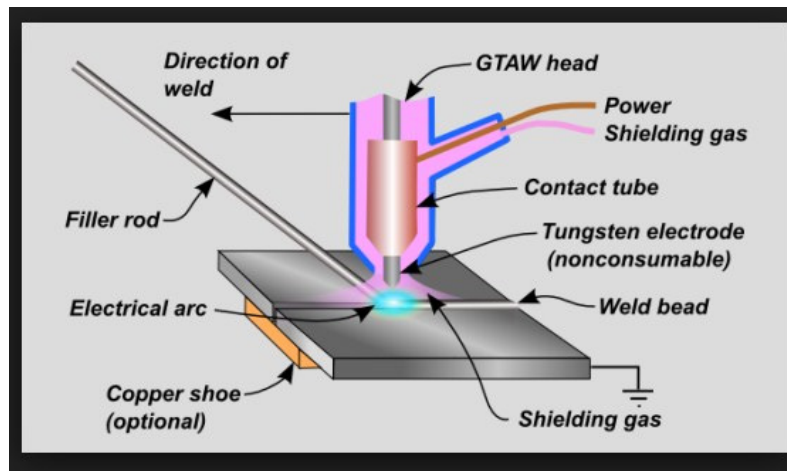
Representing the Tungsten arc TIG welding with gas shielding [Weldingis].
